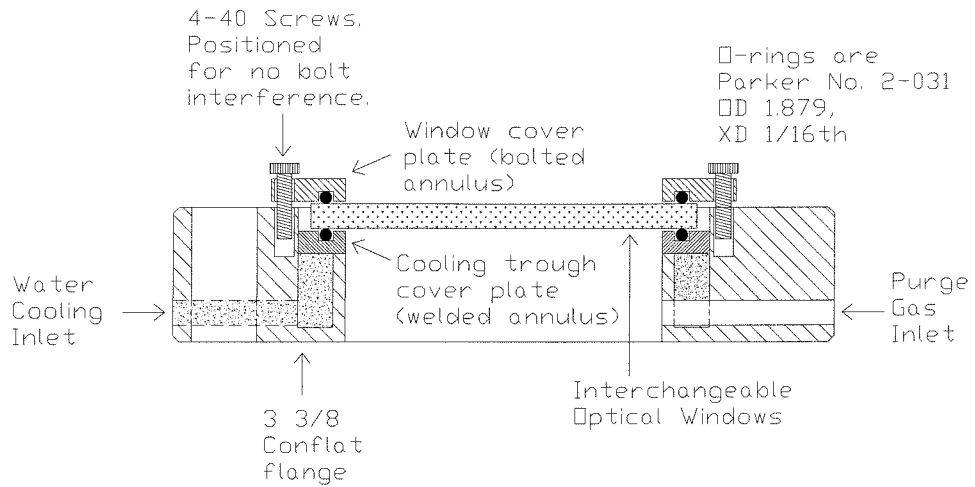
Cross-sectional view of the adaptable windowed vacuum flange.
